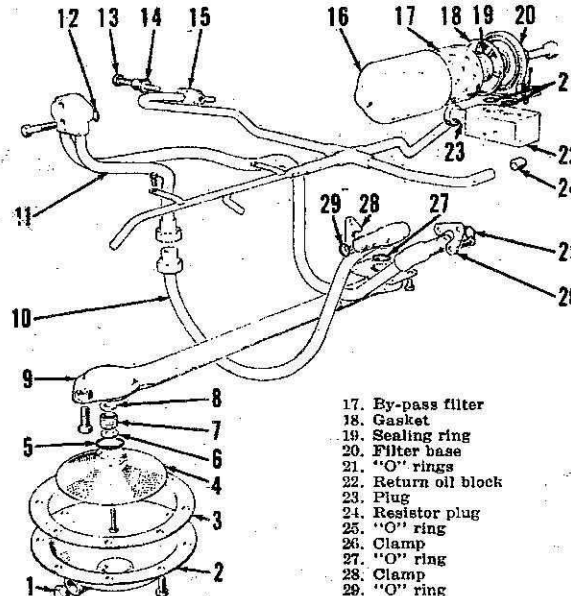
Exploded view of hydraulic lines and filters for early model 770. By-pass filter mounting block (22) was introduced to provide a return port for external hydraulic unit return oil and may be installed on earlier units where needed. Refer to Fig. 212 for model 770 and model 780 using full flow suction filter element instead of by-pass filter (16 to 20).
